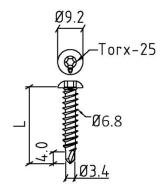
BS 6.8 Screw for fixing in thin steel sheets
